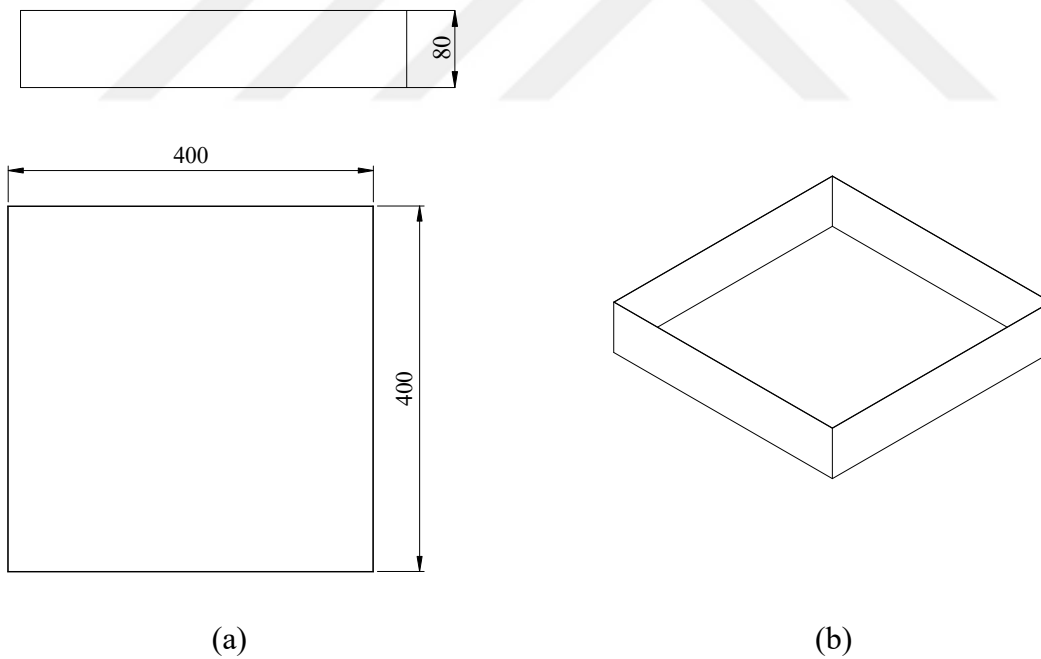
Collection tray. (a) Front and top views; (b) Isometric view
